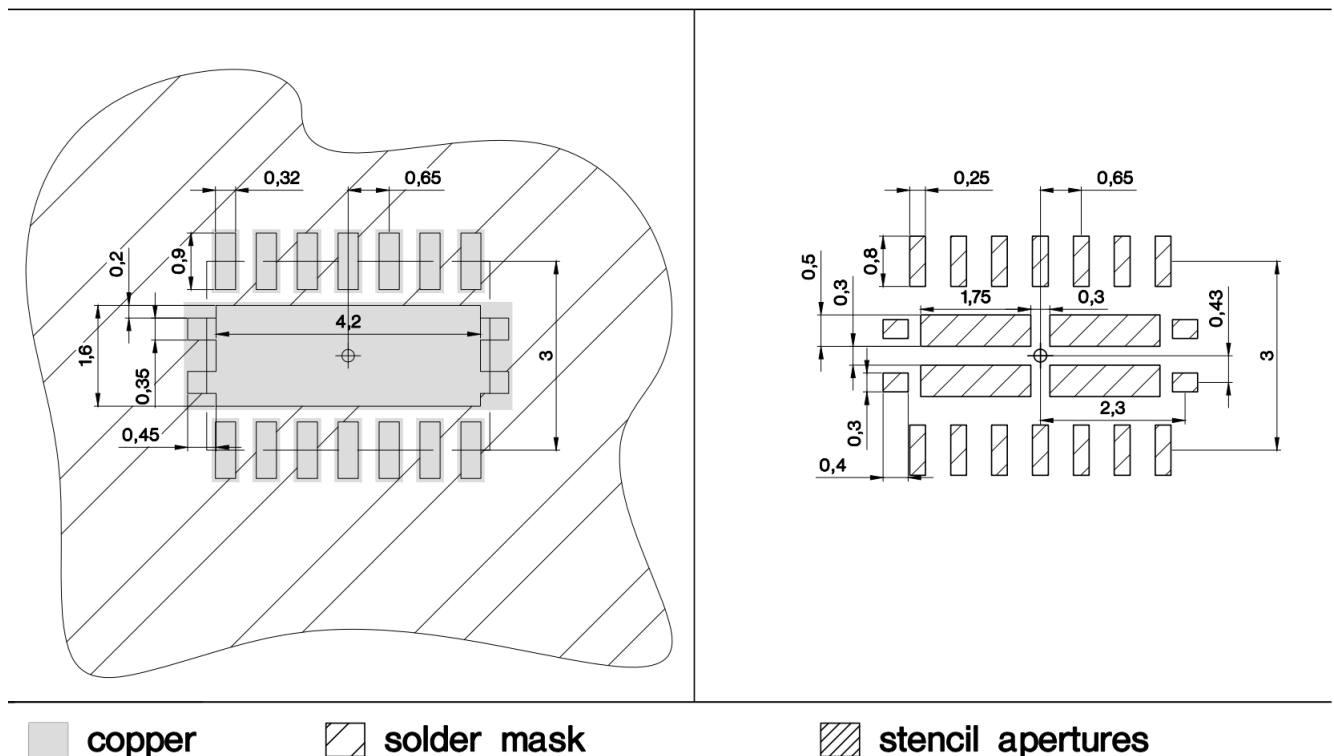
TLE9255W footprint dimensions for TSON-14 package
